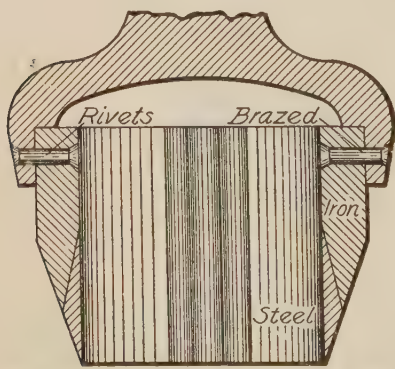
Hollow Punch of Tool Steel Welded to Back of Norway Iron
